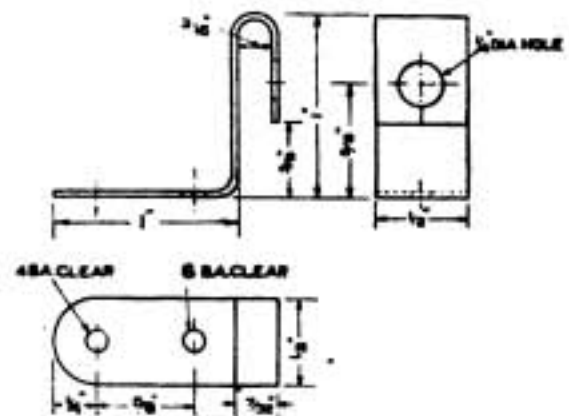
Dimensions of the contacts for the V24 Valve Holder.
